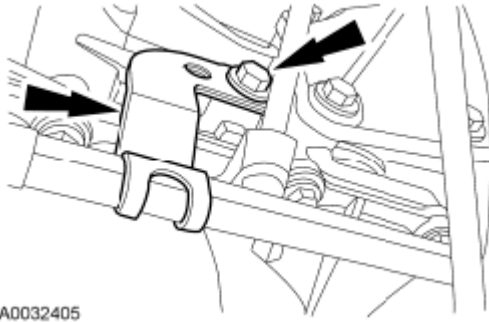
Locating Transmission Cooling Tubes Retaining Bracket
